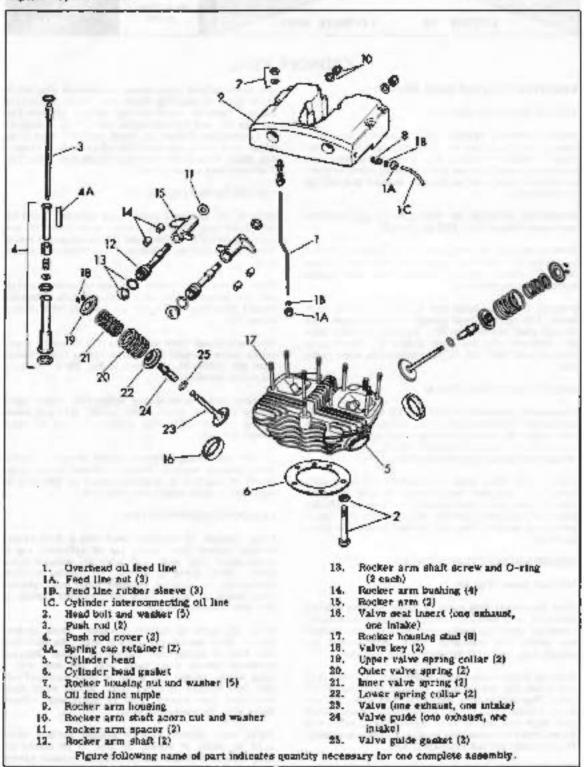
B-1. 1986 and Later Cylinder Head - Exploded View
